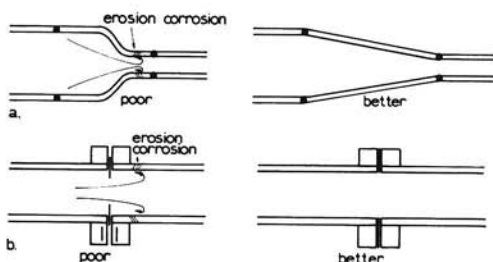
Prevention of erosion corrosion by avoiding local excessive turbulence: a. constriction in tube; b. packing ring between flanges.
